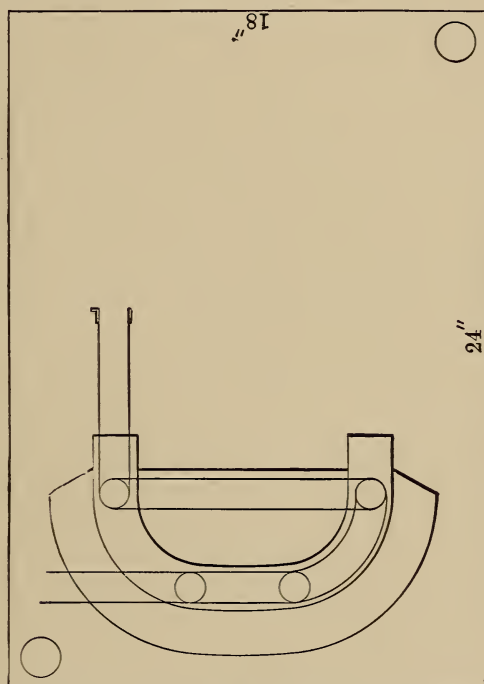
THE HIXON SLAG-SPOUT; CROSS-SECTION.
